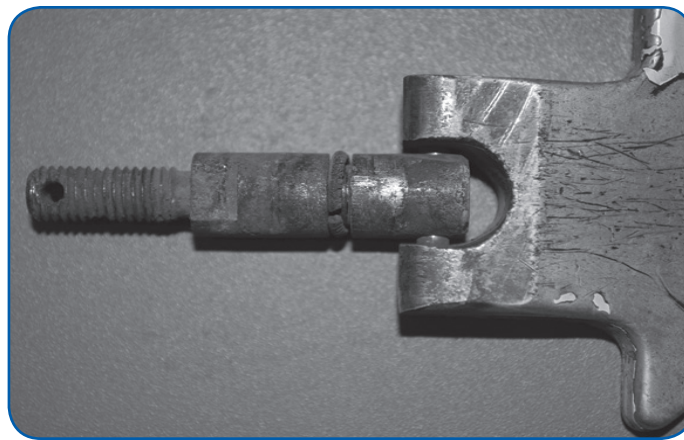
Note deteriorated O-ring and corrosion on axle shaft
